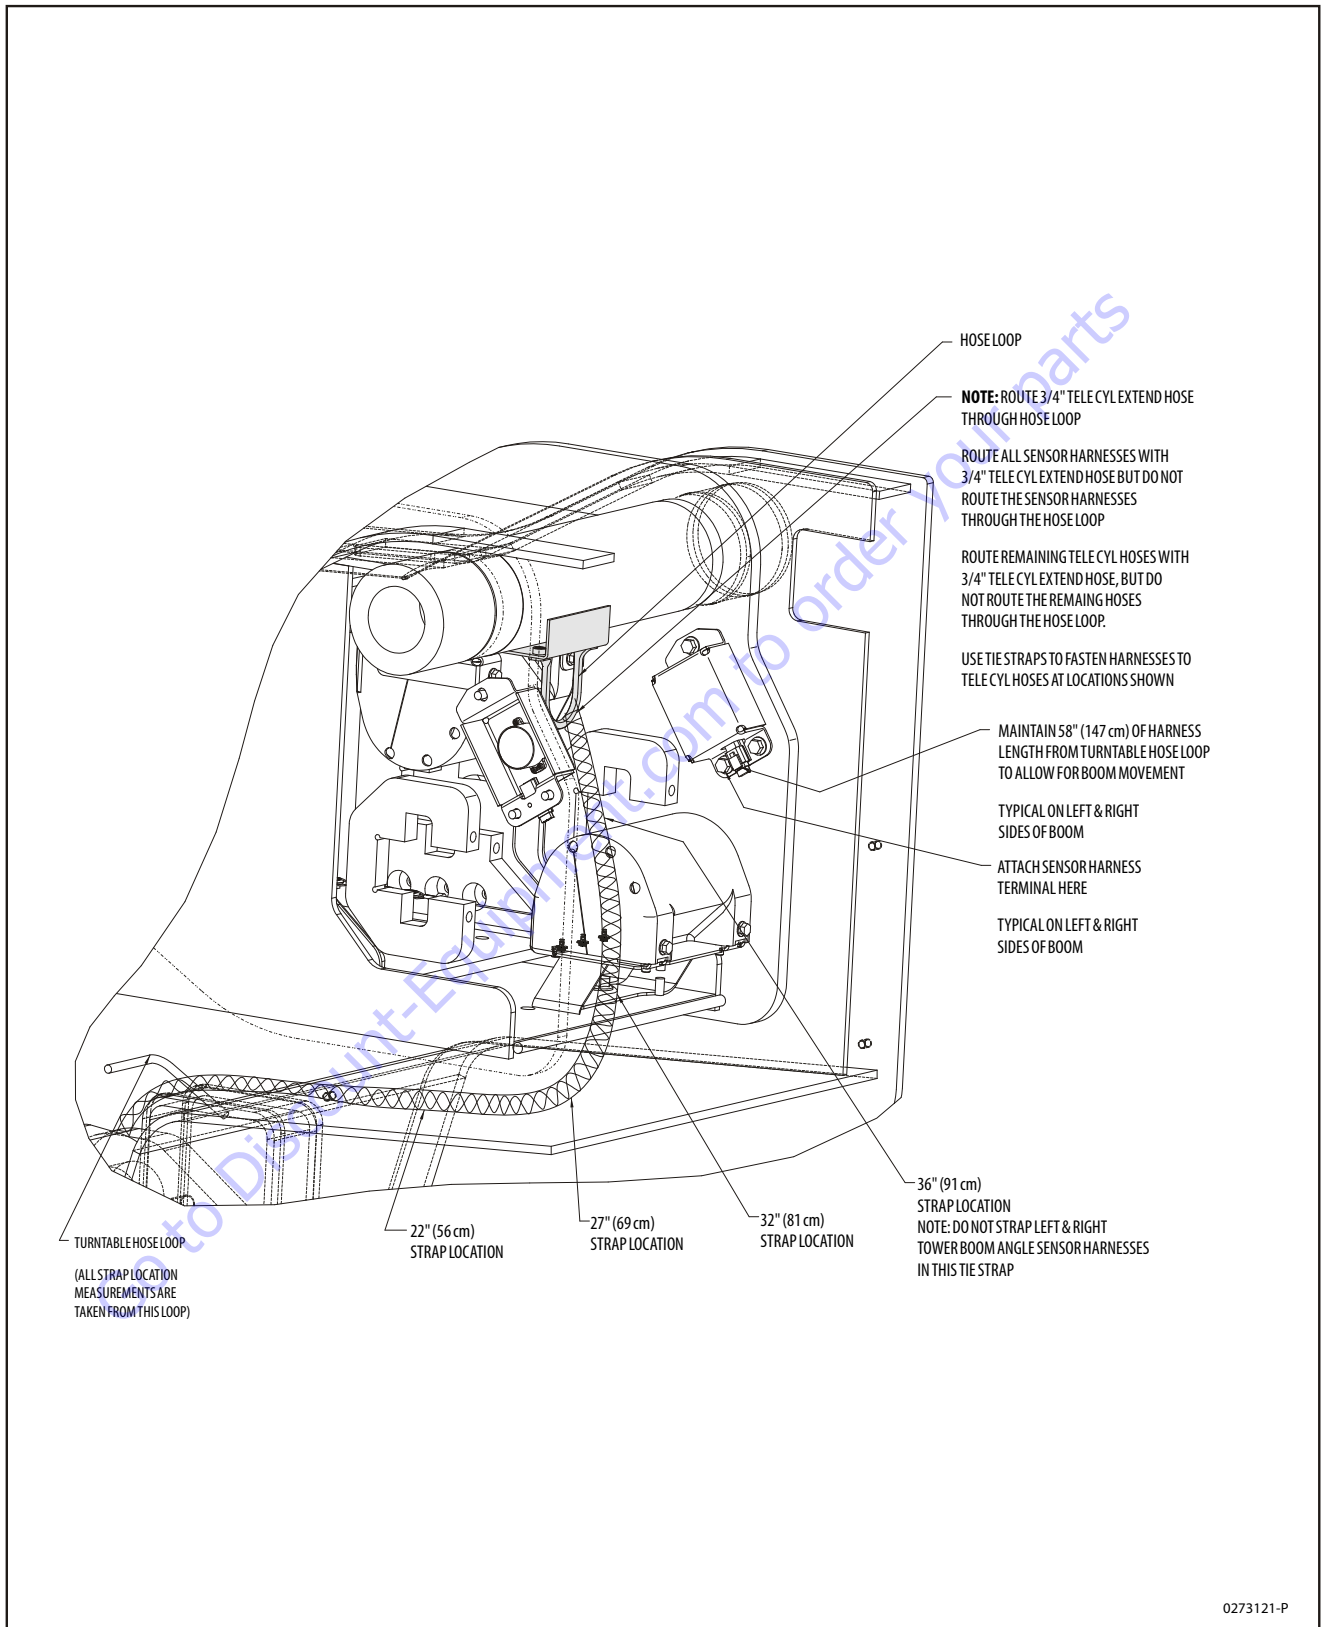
Boom Sensor Locations - Upper Length, Lower Length, & Tower Boom Angle - Sheet 2 of 2
